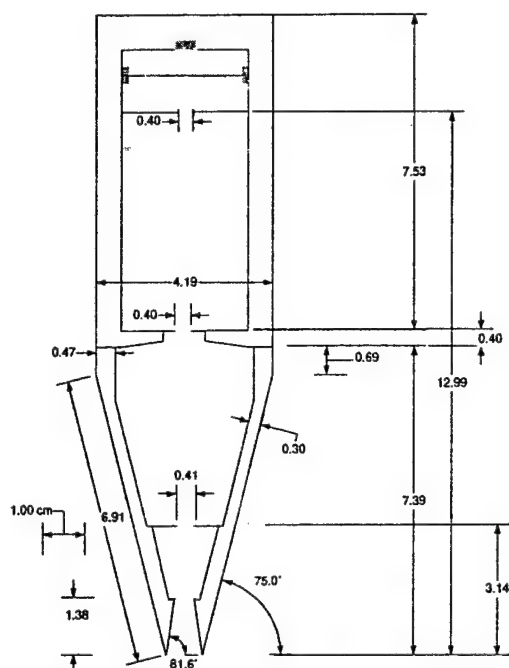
Schematic drawing of photopic probe showing dimensions in cm and the relative position of apertures and baffles.
